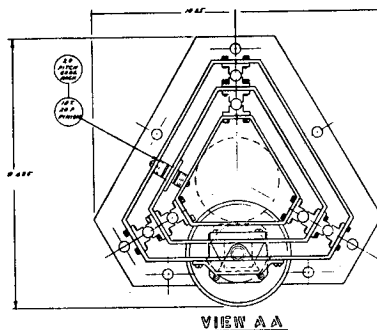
Ball Screw Drive and Extendable Mechanism Assembly
